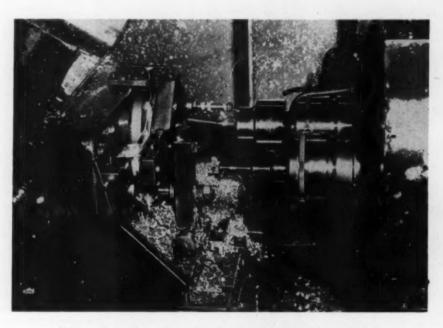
Connecting rods are bored and their large ends are faced on one side in this setup on an Excella boring machine. Only one of two ends is here shown. The carriage, left, has two separate fixtures.
